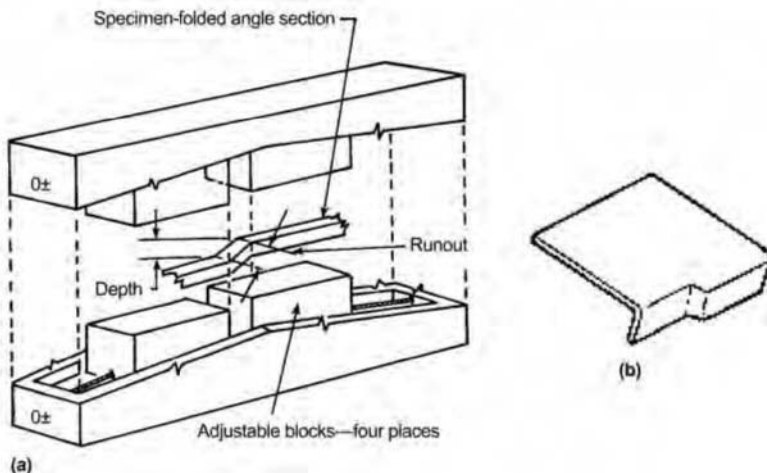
Jogging: (a) universal joggle die; (b) jogged flange
